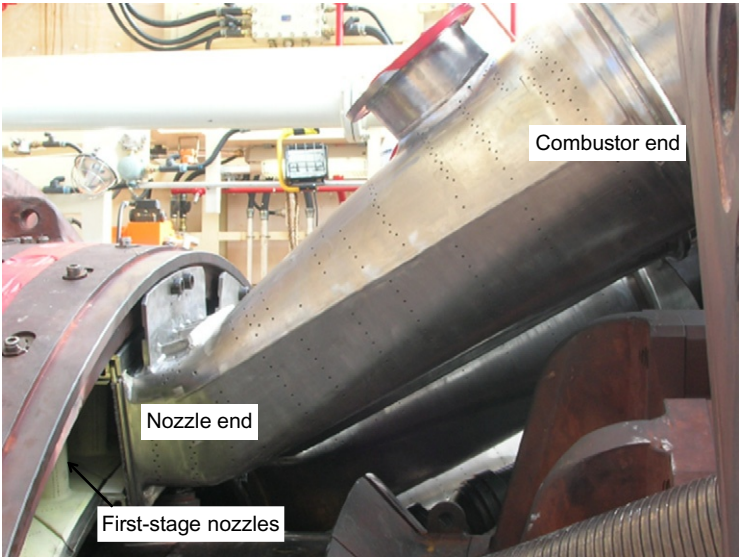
A transition piece for the W501F gas turbine joining the combustor to the sections of the first-stage nozzles.
